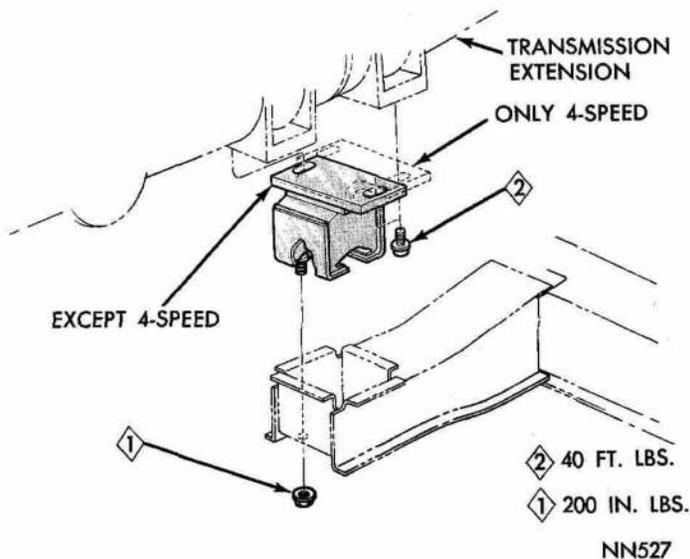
Engine Rear Support (119.5" and 121.5" Wheelbase)
